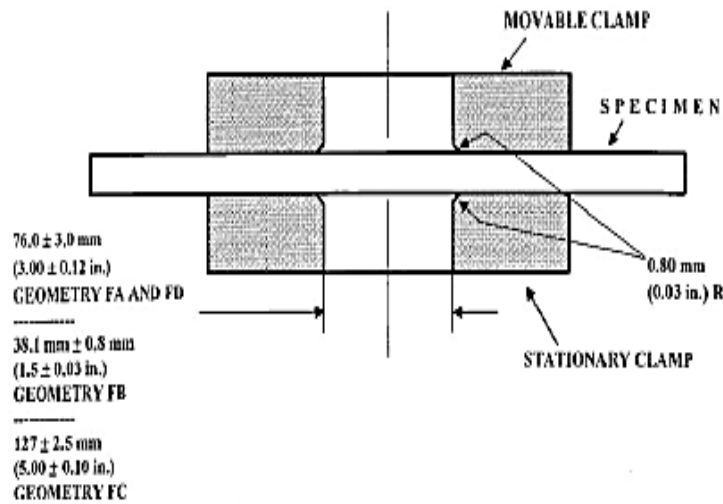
Support Plate/Specimen/Clamp Configuration for Geometries FA, FB, FC, and FD
